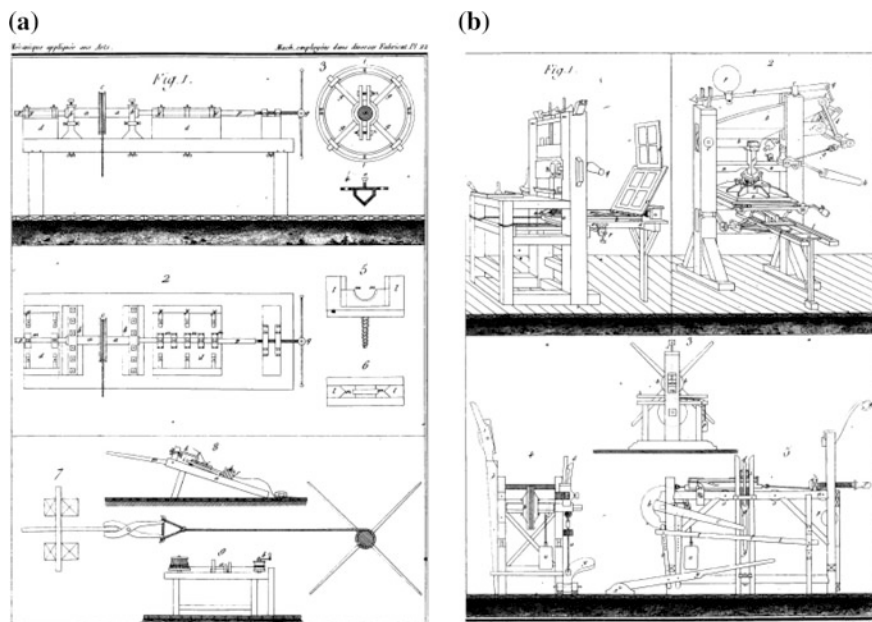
Examples of machine drawings in the book on Machines for Manufacturing by Borgnis (1819c): a machines for cable production; b printing machines
